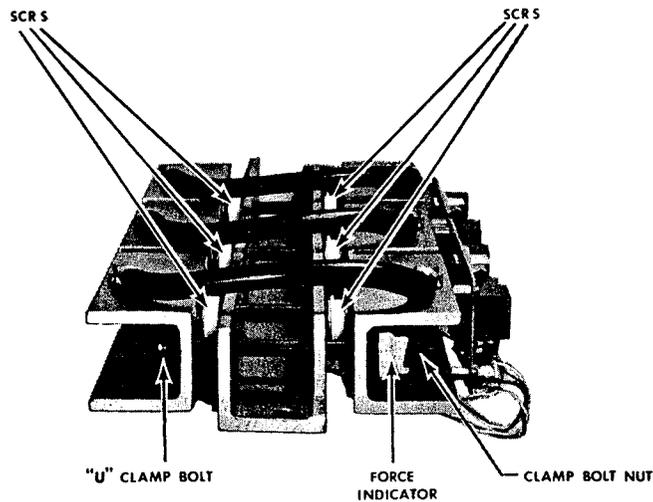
SCR Heatsink Configuration, "U" Clamp Type with Force Indicator
